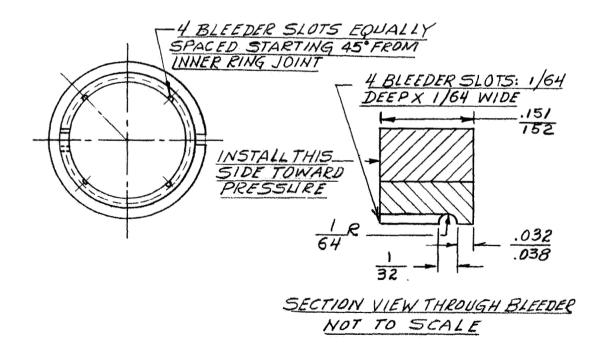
Pressure Balanced Sealing Ring (for 3-inch Rod)
